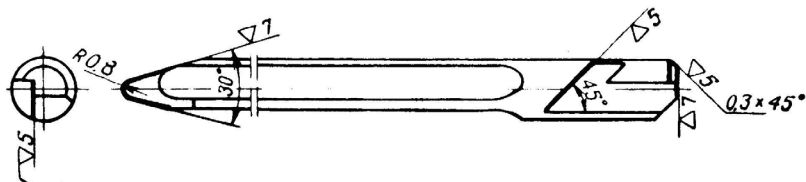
Repair drawing of 9-mm Makarov pistol drummer
